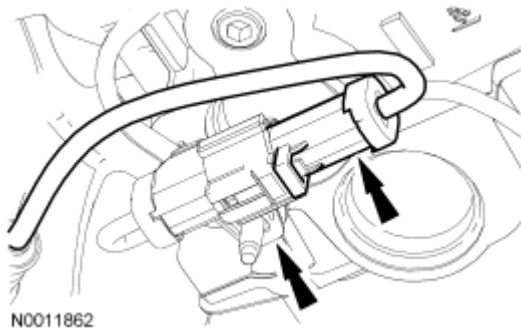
Locating Heated Oxygen Sensor (HO2S) Electrical Connector
